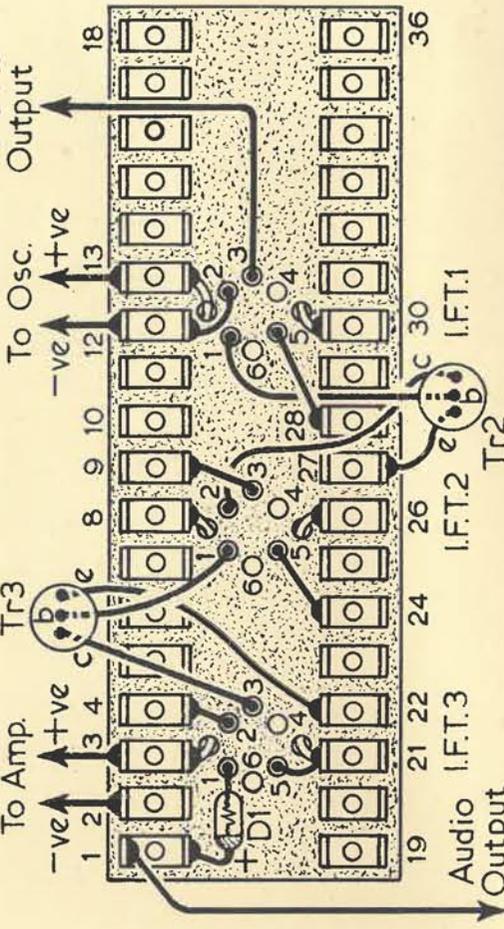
WIRING THE TRANSISTORS AND I.F. TRANSFORMERS
